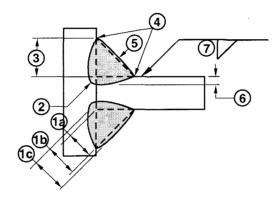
illustrates the various parts of a fillet weld.
